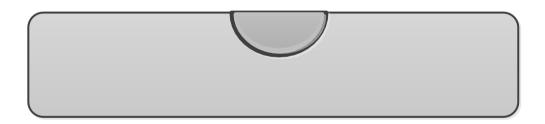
Additional filler added to fill the pit. Do not bridge it.
